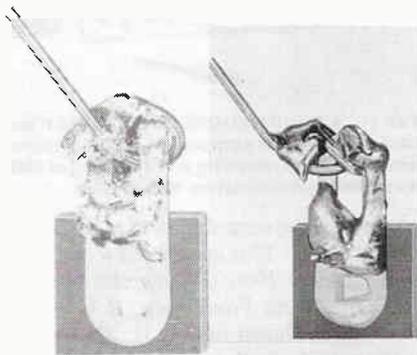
A COLD SOLDER JOINT may resemble a or b. One is as bad as the other.
